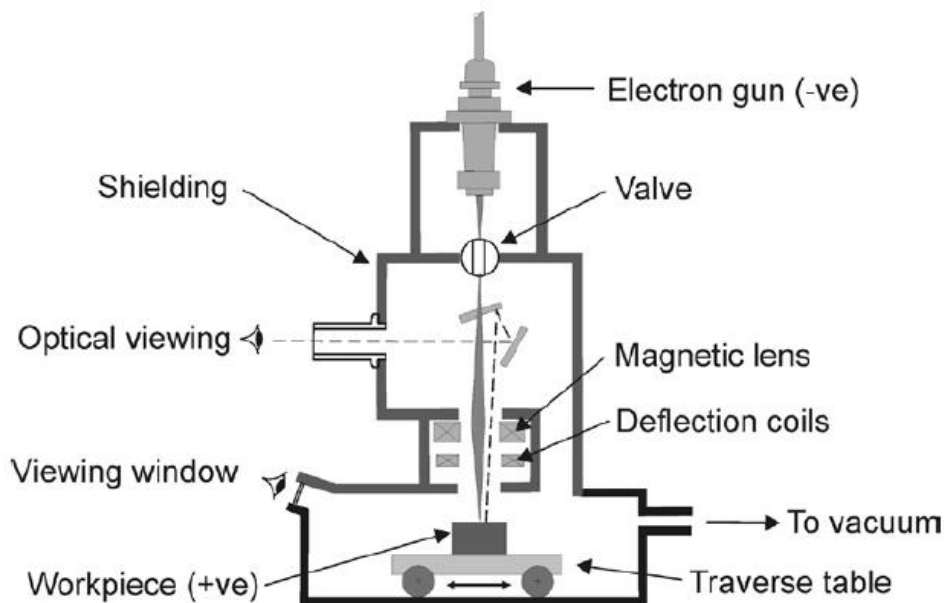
Electron Beam Welding Equipment (Swift & Booker, 2013).
